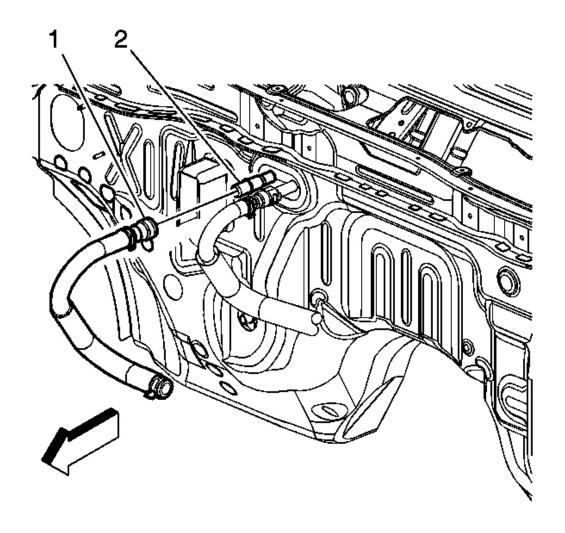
View Of Inlet Heater Hose Quick Connect Courtesy of GENERAL MOTORS CORP.
